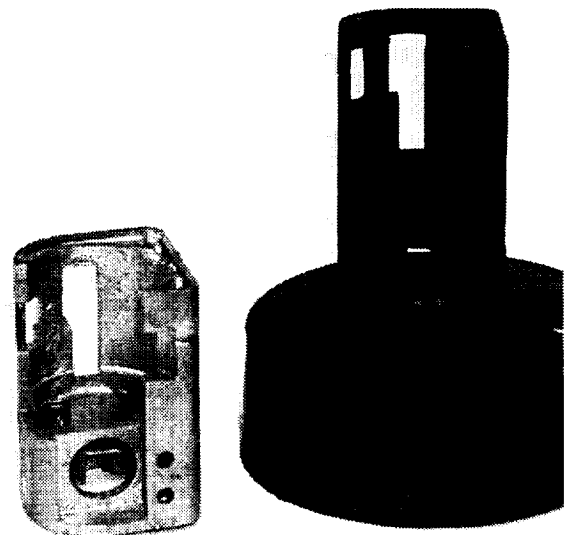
2-inch aluminum casting and printed wax component on wax gates for casting.
